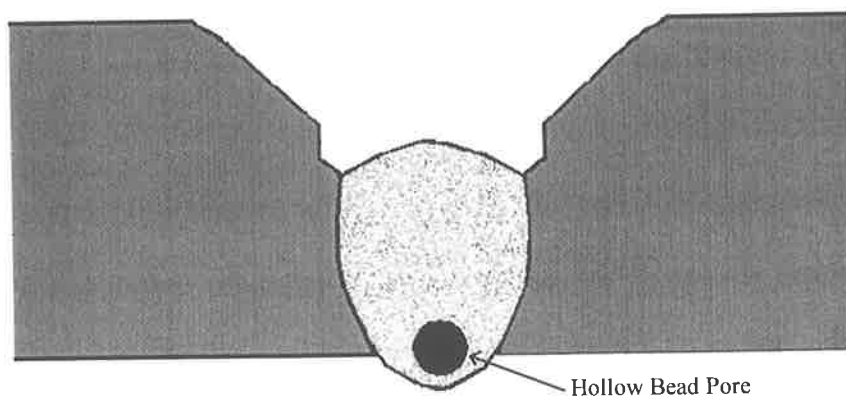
Schematic of the cross section of a weld with a hollow bead pore at the bottom of the bead.
